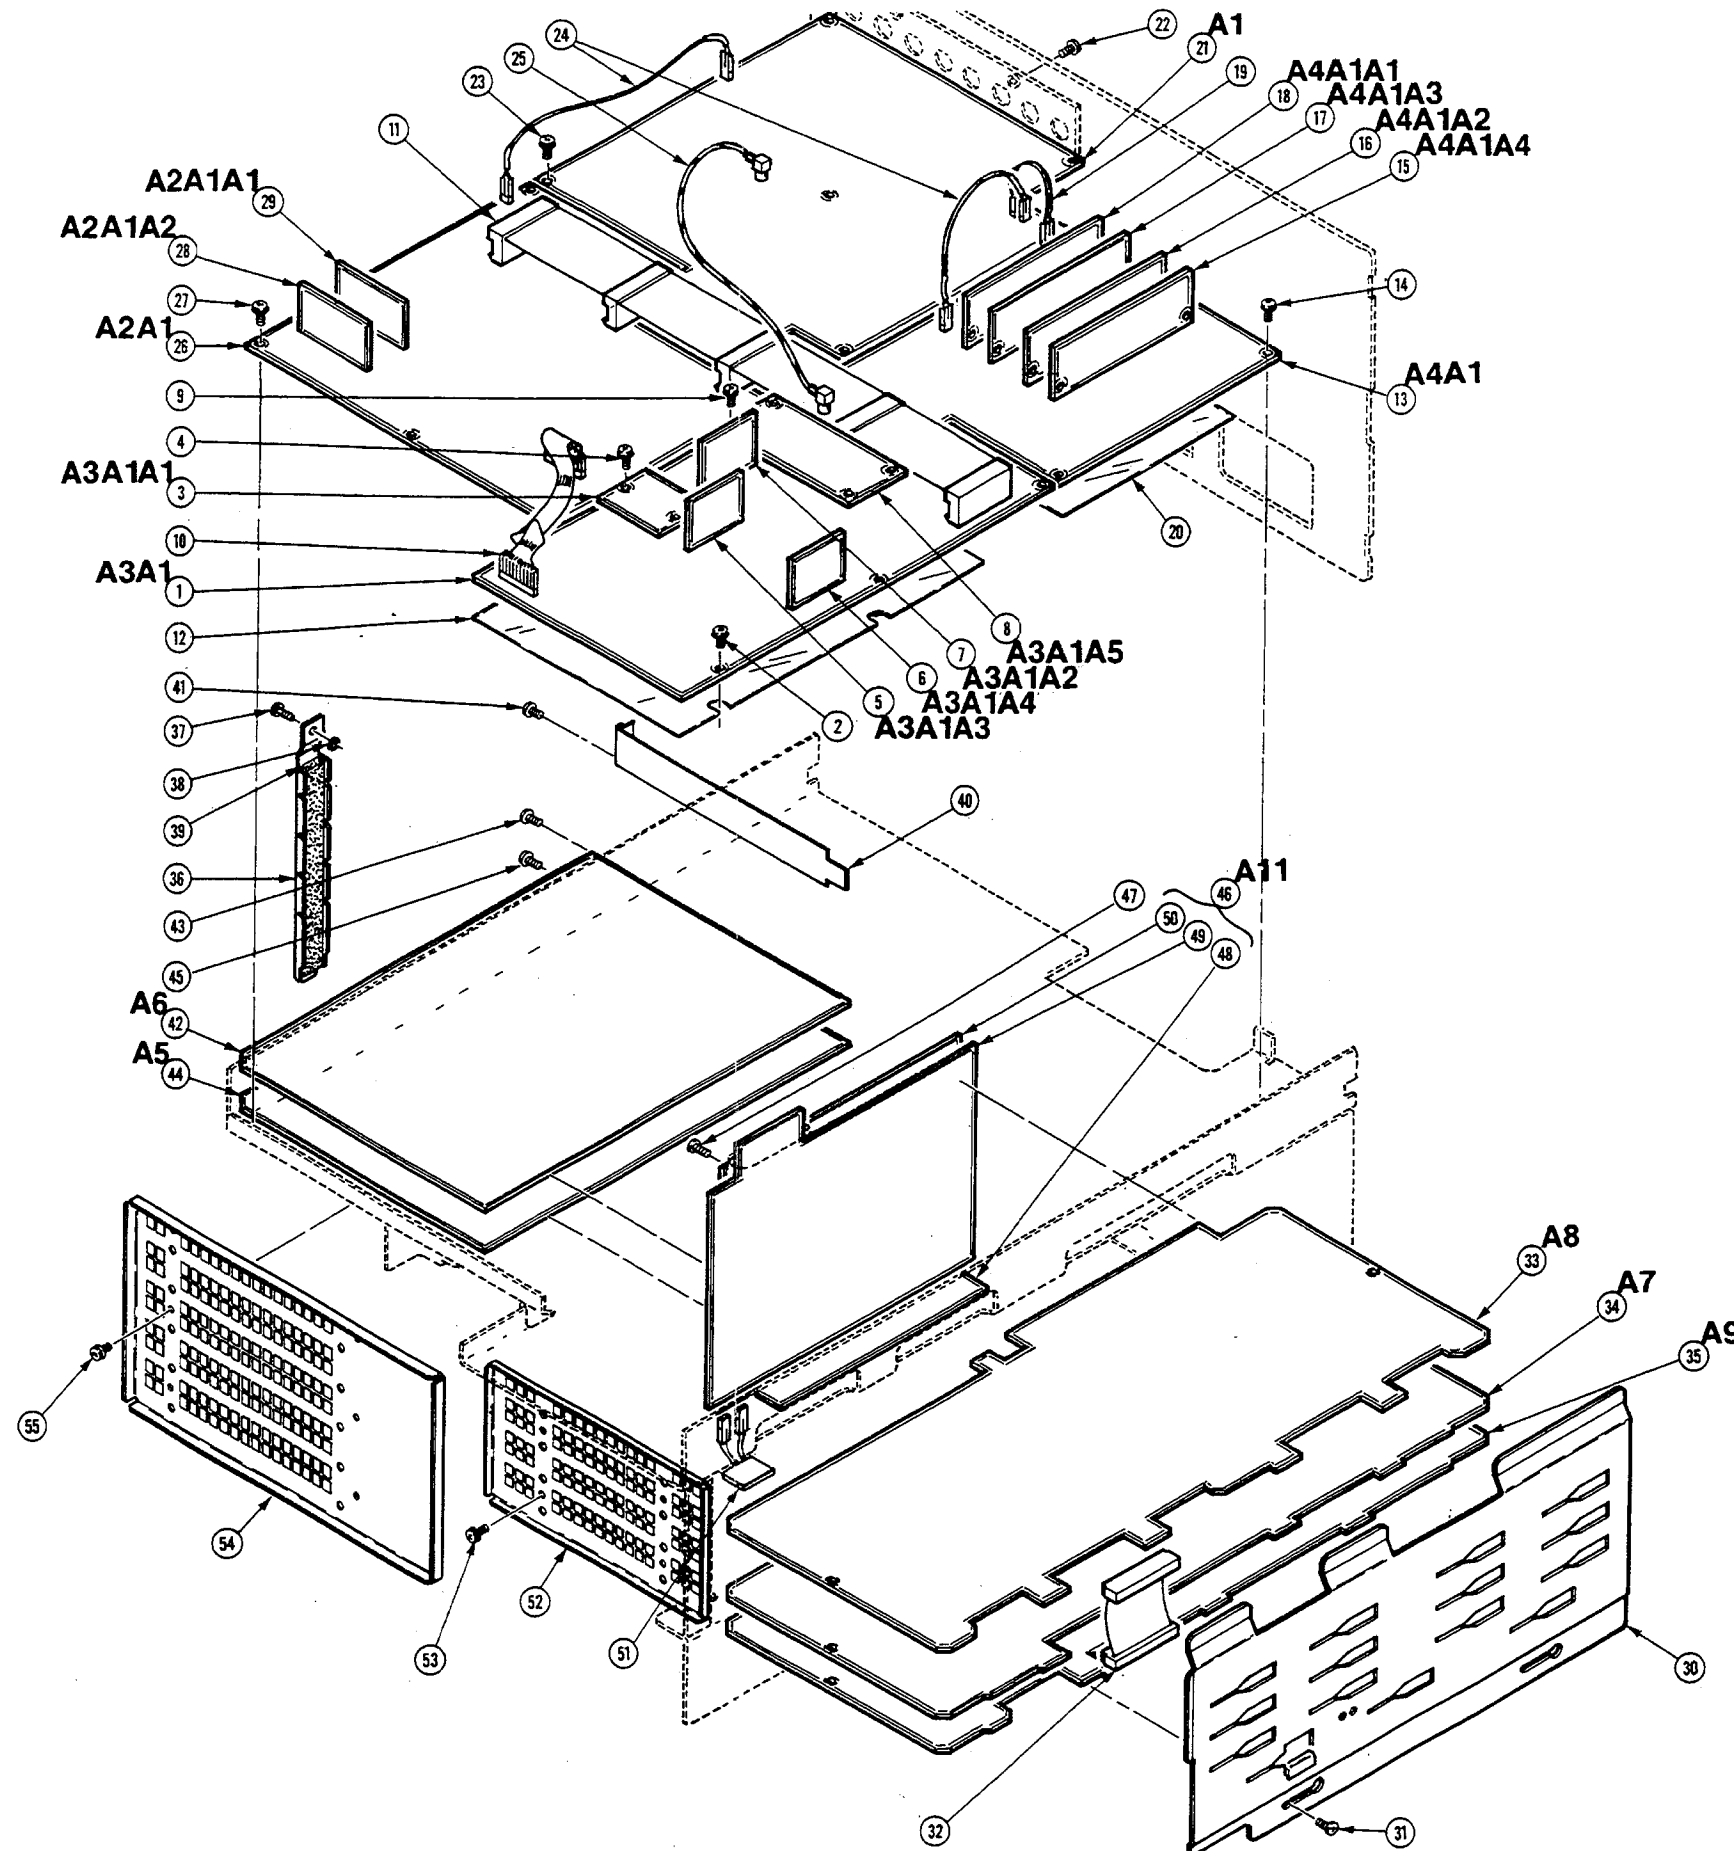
FRONT ASSEMBLIES & PWR SUPPLY
